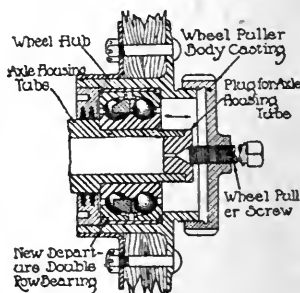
Hub Wheel Puller for Removing Wheel and Bearing from Shaft or Axle Tube.
